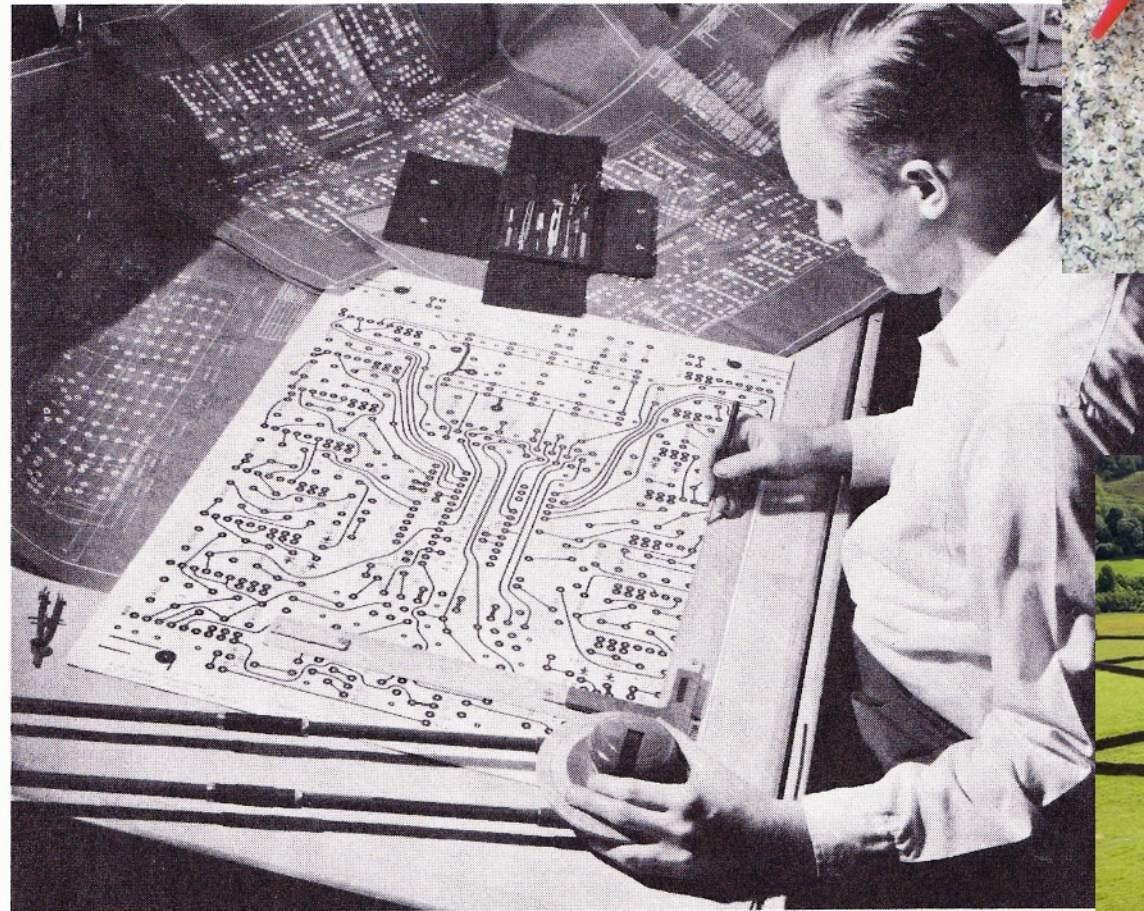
Drawing a printed circuit. The drawing is carefully planned and executed for photographic reproduction on the circuit board.
